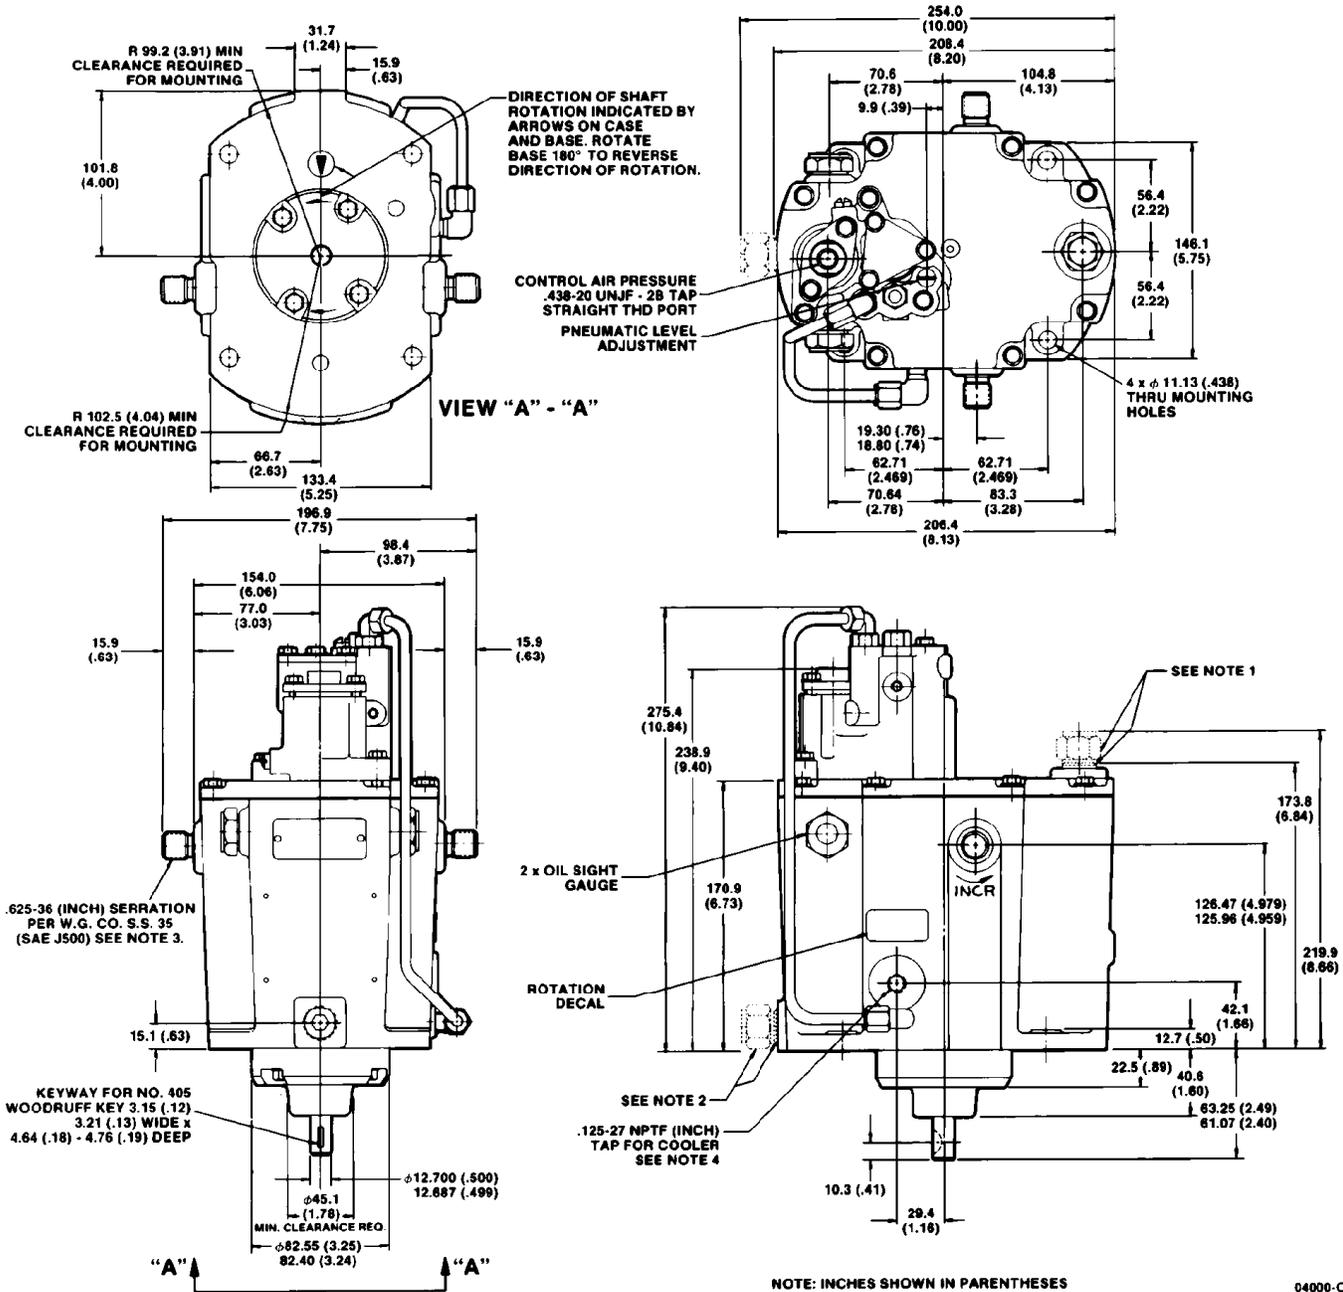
Outline Drawing of TG-13/17 Governor with Pneumatic Speed Setting Device
